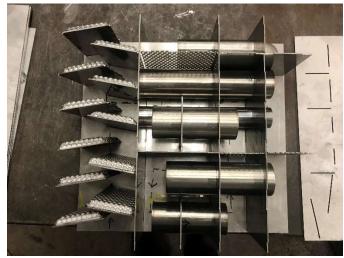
Silencer during manufacturing highlighting the layout of the reflective first chamber and multi-pass expansion chambers
